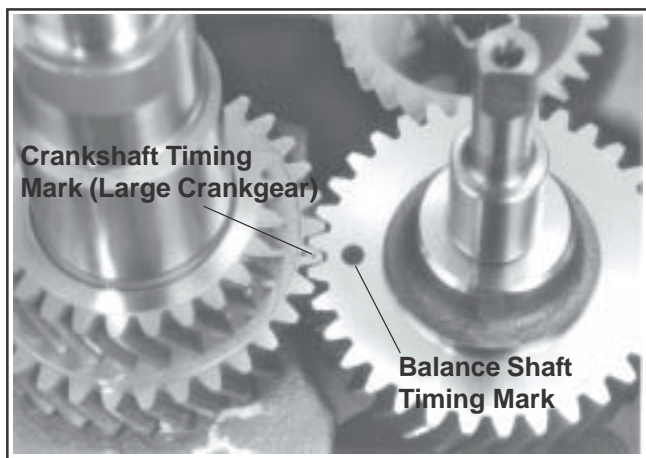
Aligning Timing Marks on Crank Gear and Balance Shaft Gear.
